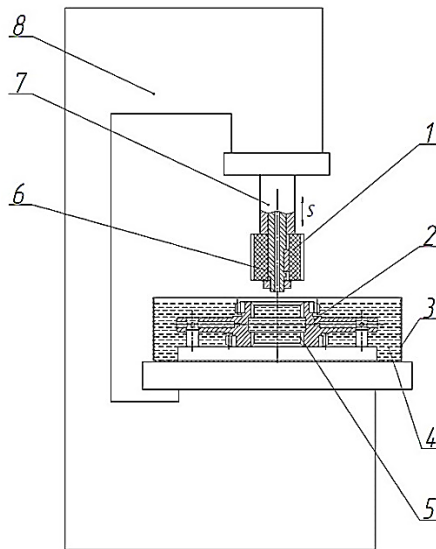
Scheme of restoration process using the electric erosion machining of the worn out surfaces of synchronizer carriages:
